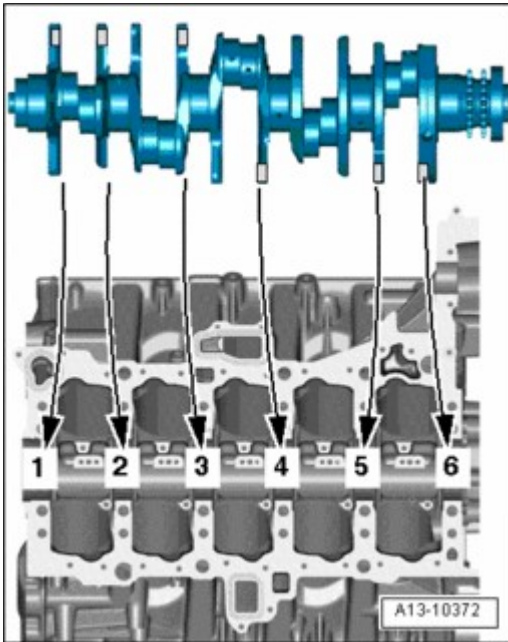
Allocation Of Crankshaft Bearing Shells For Guide Frame - Version I
